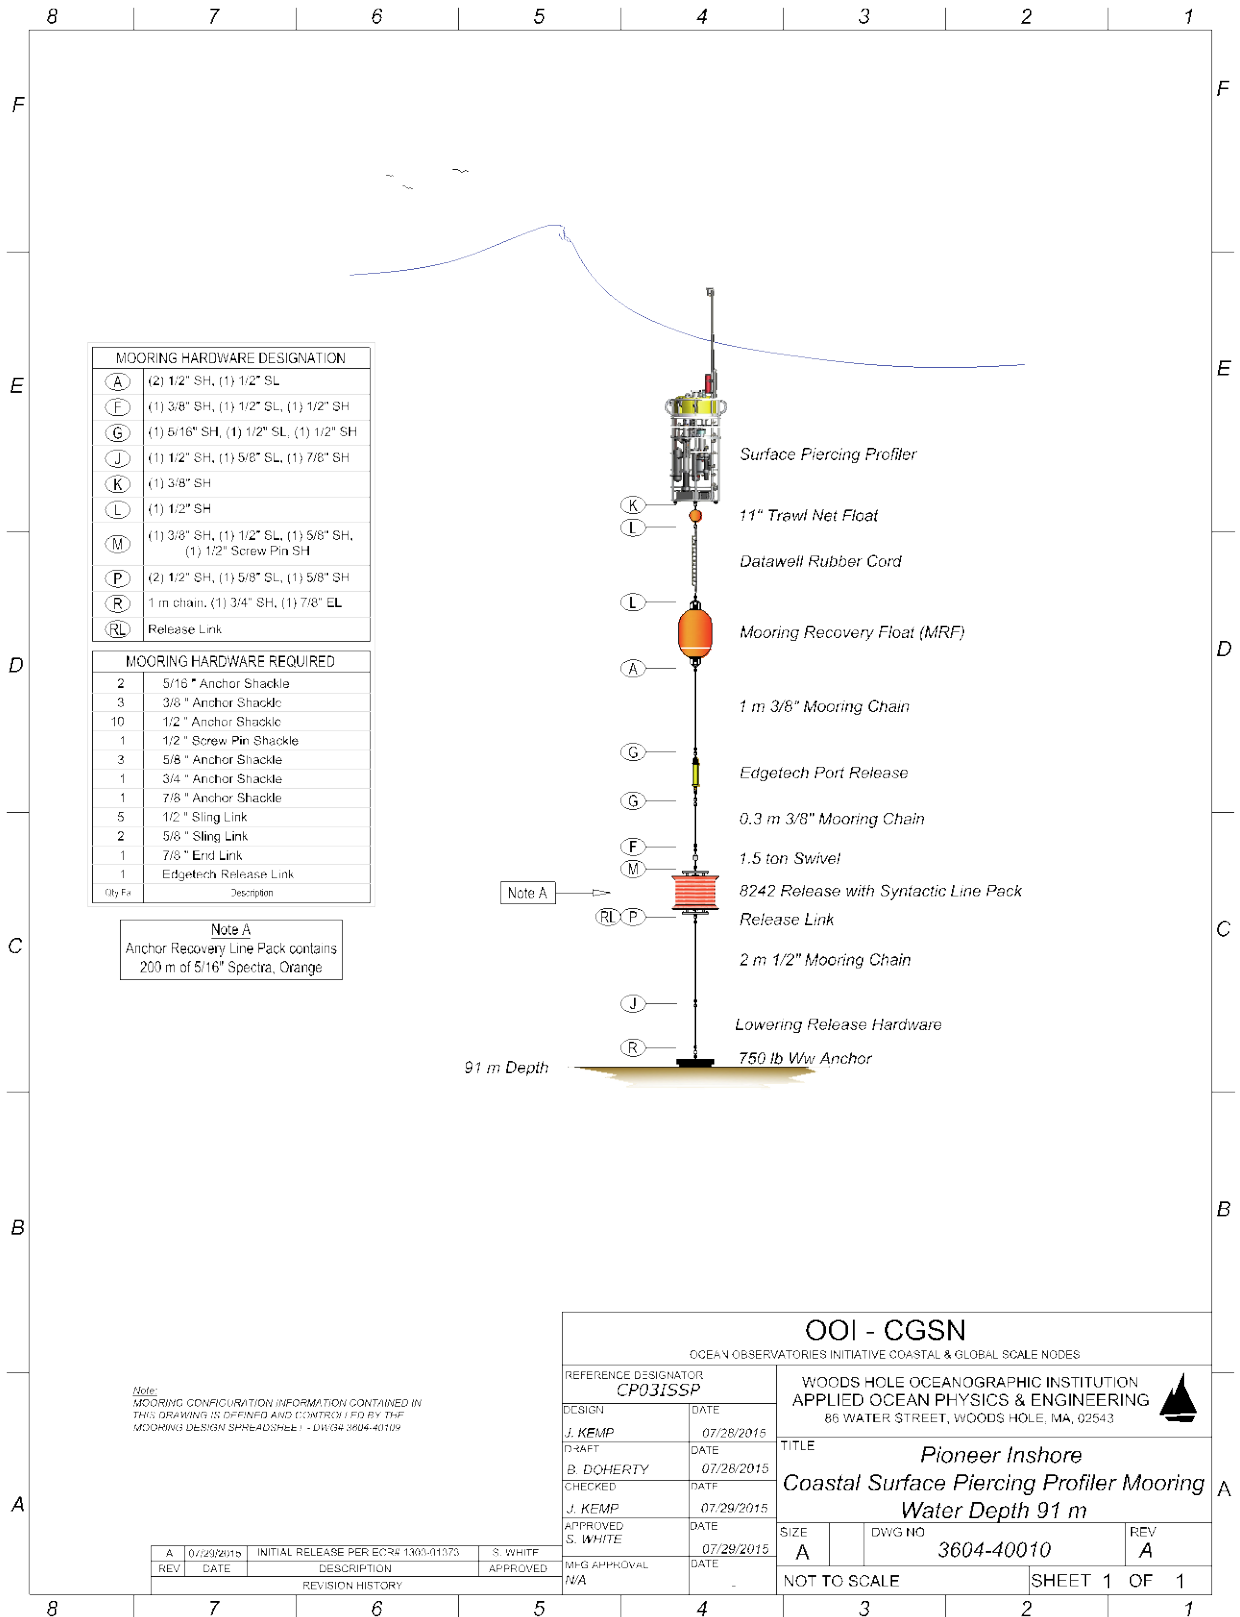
Pioneer Inshore Surface Piercing Profiler (CSPP)
